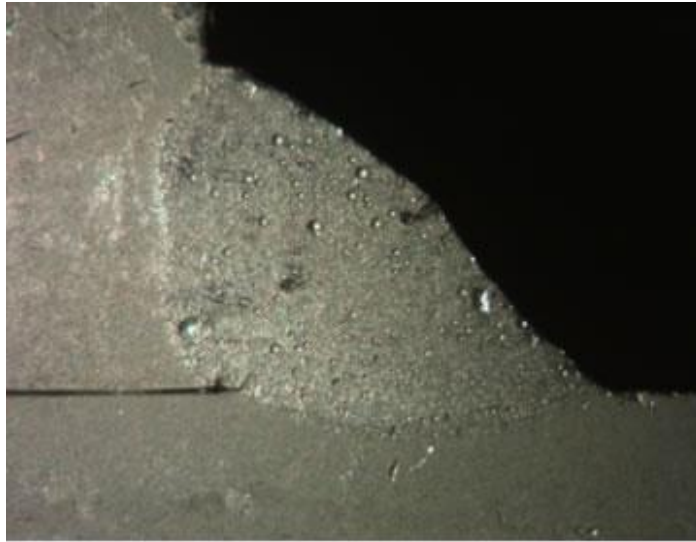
Hydrogen porosity present in welded joint of aluminium [72]
